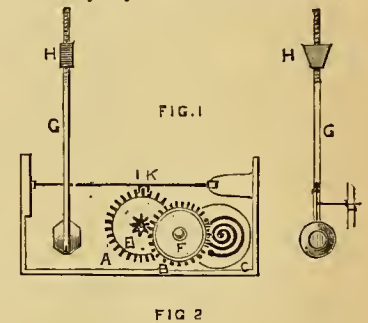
Beating Portion of Mechanism. FIG. 2.—Striking Mechanism.
